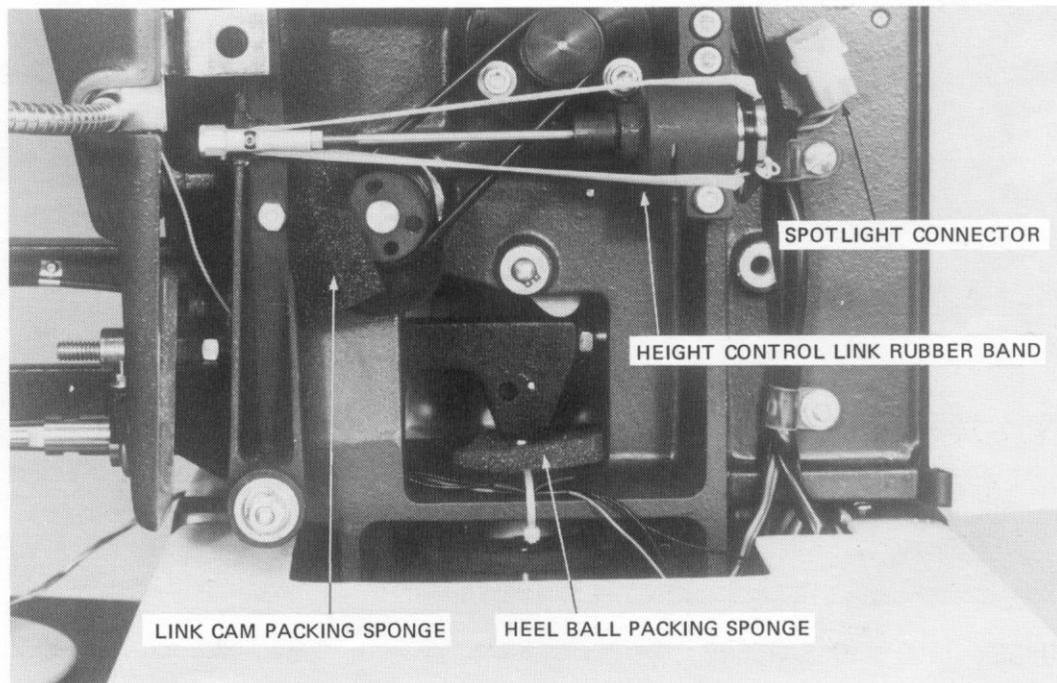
MAIN HEAD PACKAGING - INNER RIGHT SIDE
